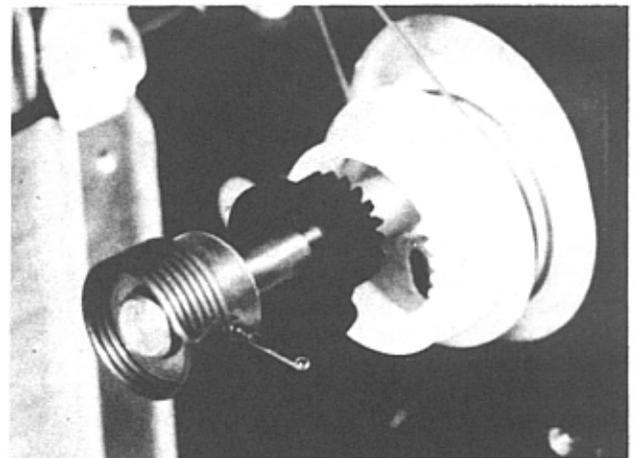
ECCENTRIC FRONT BEARING KIT
